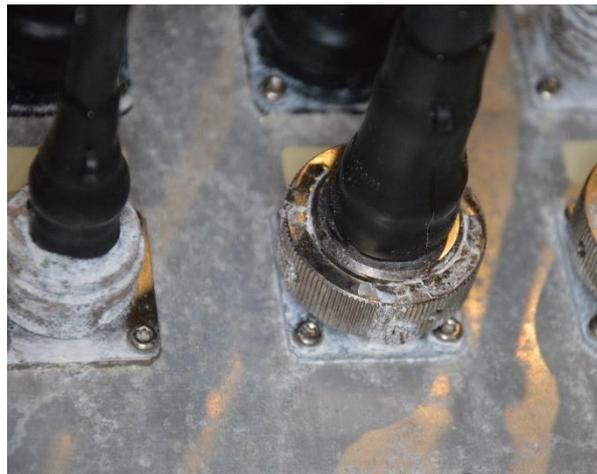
Flakings from the surface plating. Plate #3 position #31.
